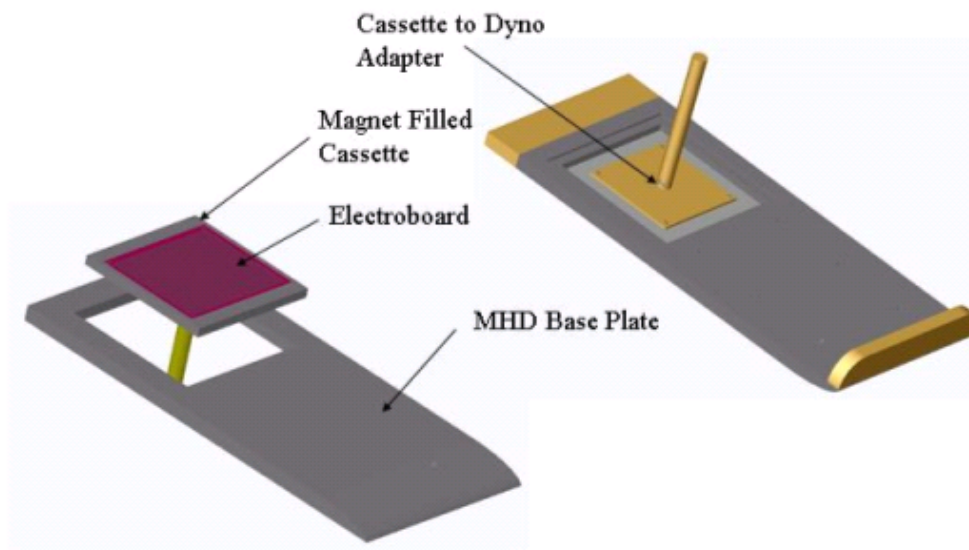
MHD base plate and cassette 3d solid assembly model
